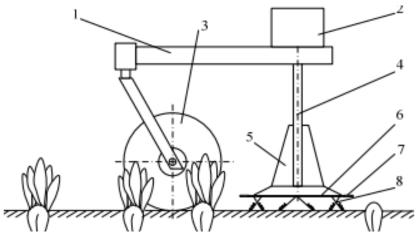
Apparatus for cutting and cleaning heads tops Root: 1 - frame; 2 - reducer; 3 - support wheel; 4 - shaft, 5 - Bitters; 6 - disc; 7 - knife; 8 - purifying element.
